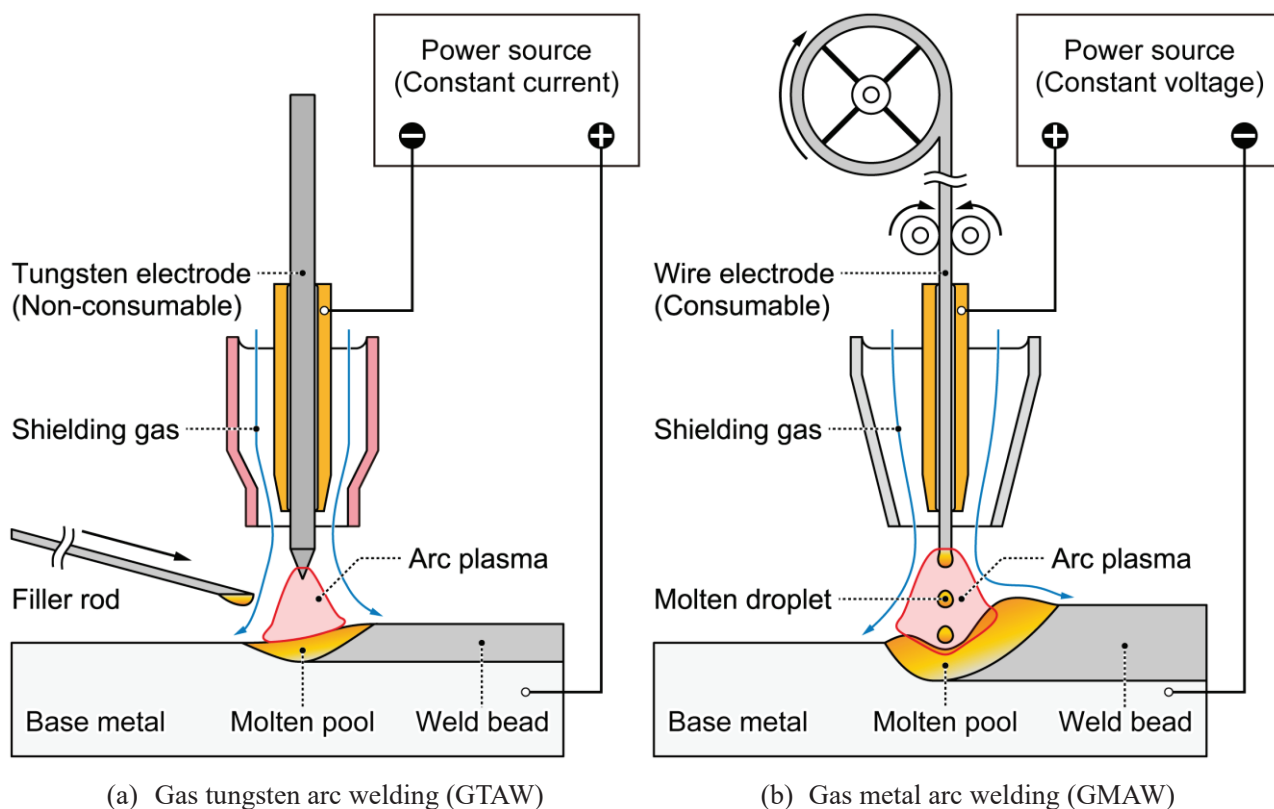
Schematic of gas-shielded arc welding.
